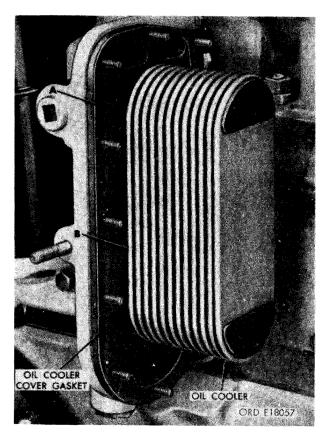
REMOVING OR INSTALLING OIL COOLER COVER GASKET AND OIL COOLER.
